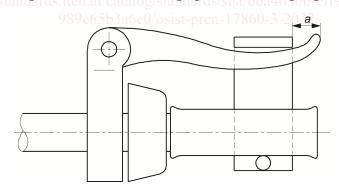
Method of fitting the gauge to the brake-lever and handlebar (Minimum grip length is shown)
